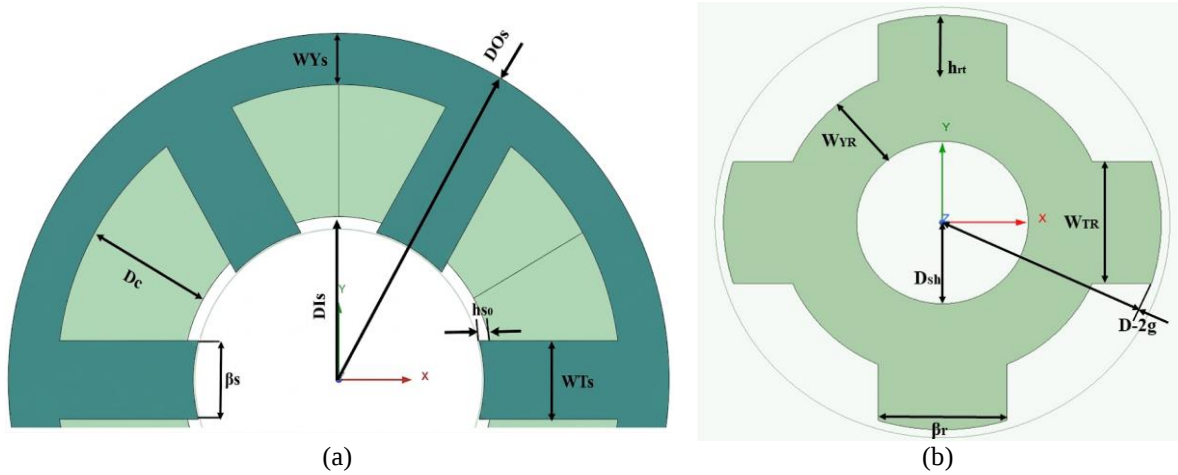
Machine cross-section: (a) stator geometry and (b) rotor geometry
